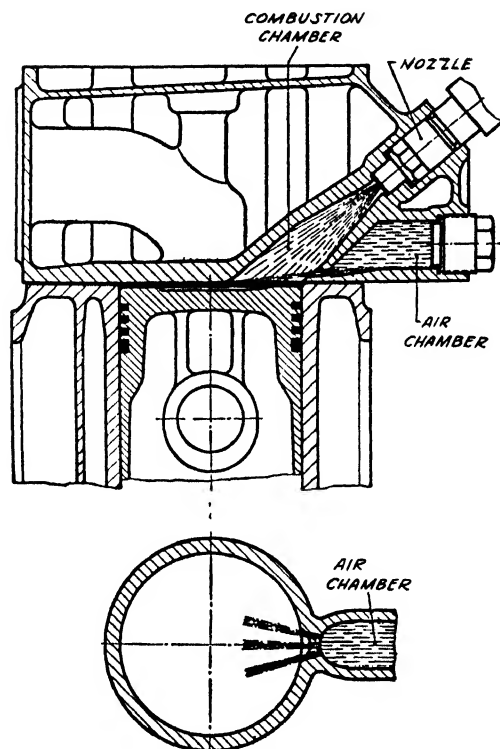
M.A.N. AUXILIARY-CHAMBER COMBUSTION HEAD.
